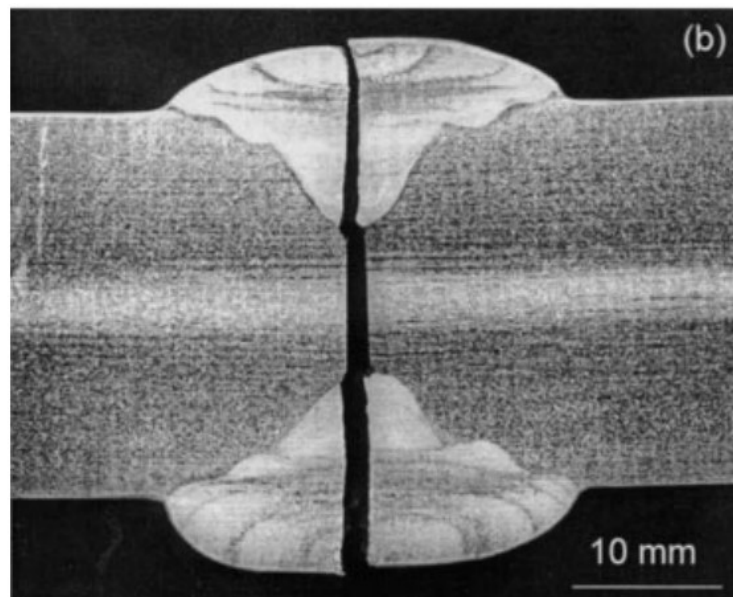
The fatigue crack grows from the root directly through the weld and its reinforcement in an aluminum PJP weld [31].
